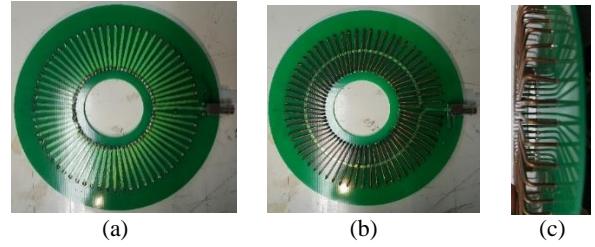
(a) PCBRC. (b) CBRC. (c) Side view of CBRC
